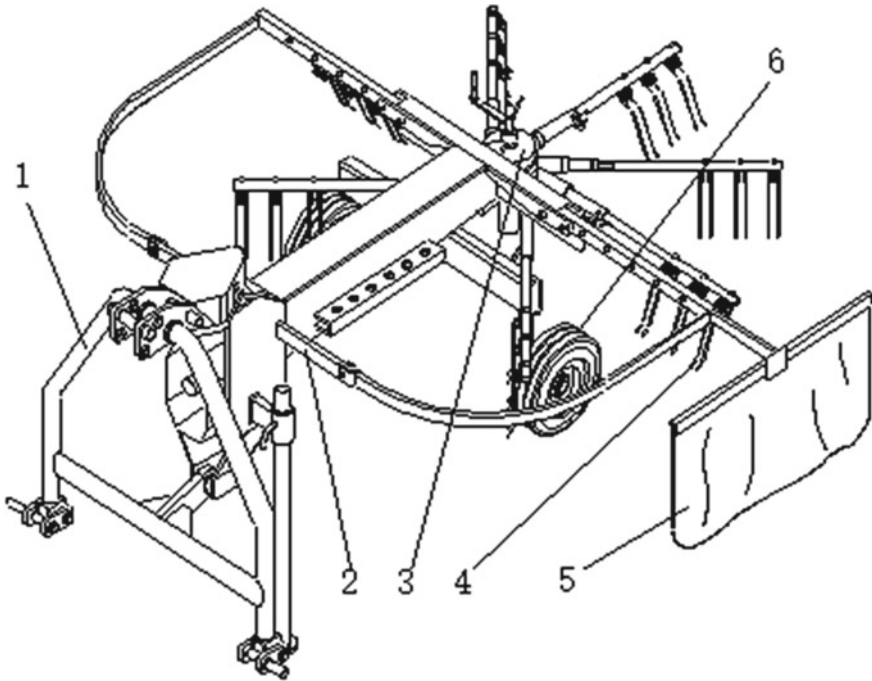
Schematic diagram of a single-rotor horizontal rotary hay rake. 1. Suspension frame; 2. Frame; 3. Transmission box; 4. Rake rotor; 5. Grass curtain; 6. Wheel
